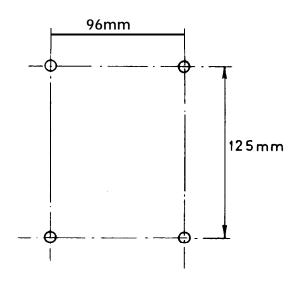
(d) WALL MOUNTING DIMENSIONS FOR RING GENERATOR UNIT
